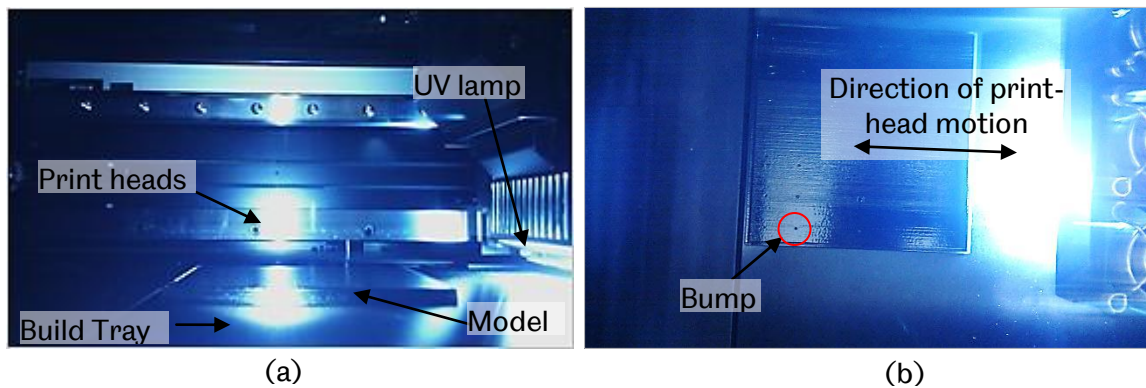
3D printing of the SMETT prototype in the Objet printer (a) side view and (b) top view
